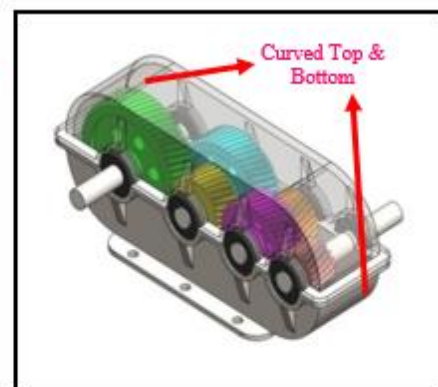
Modified 3D CAD model II for three stage helical gearbox with rib and cover assembly cross sectional view
